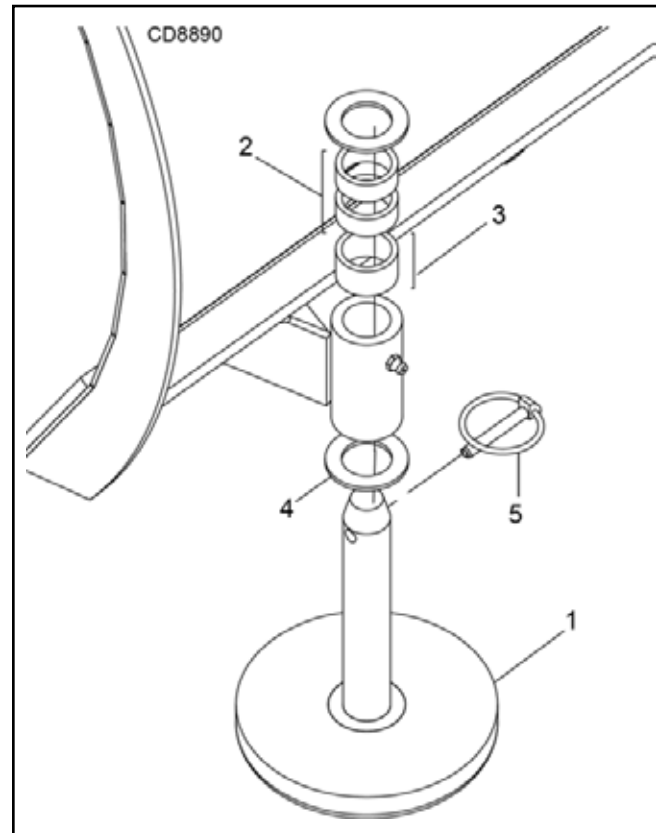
Loader Front Blade Urethane Skid Shoe Kit Installation
